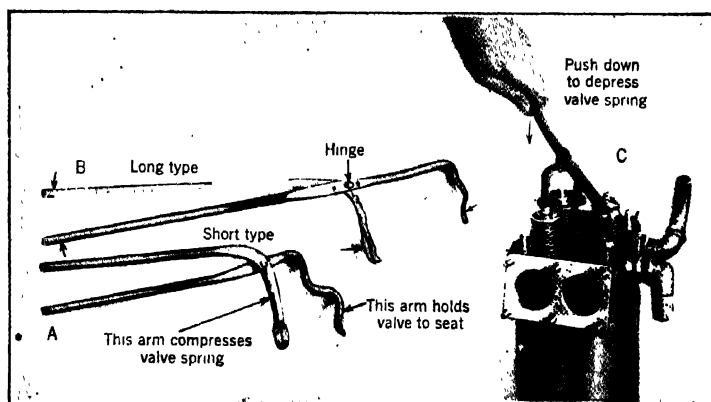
Valve Spring Compression Tongs at A and B. Special Valve Spring Compressor Used with Fiat Engine Cylinder Shown at C.
